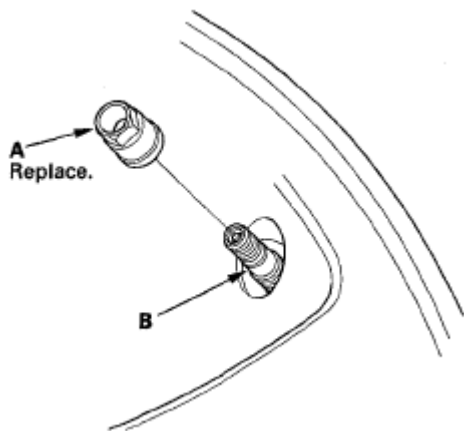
Identifying Valve Stem Nut, Tire Pressure Sensor And Valve Stem
